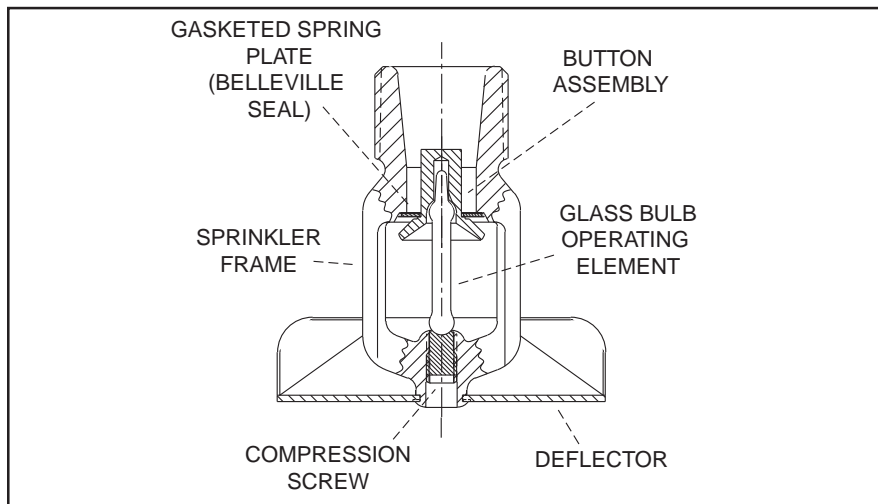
Cross Section Model WS, Pendent Vertical Sidewall Specific Application Window Sprinkler
